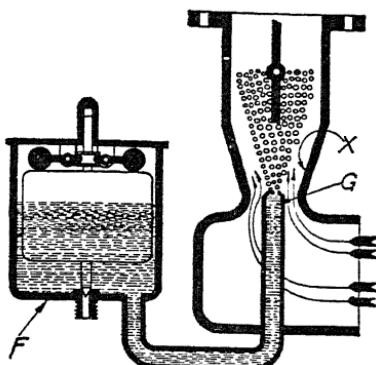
Section of simple carburetor with one plain tube. The mixture grows too rich.
